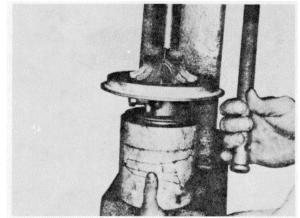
L-11. Pressing Out the Turbine Wheel and Shaft
